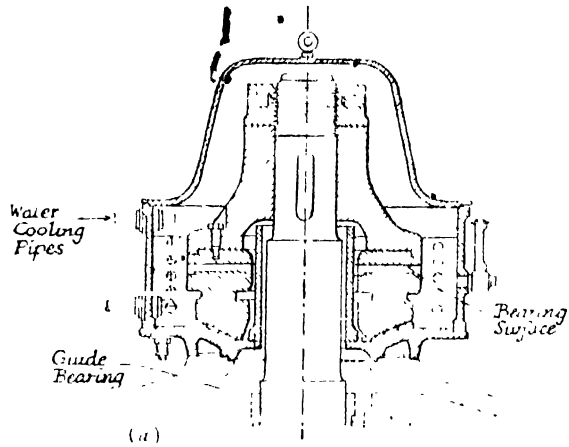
Vertical Shaft Turbine with Submerged Bearing
